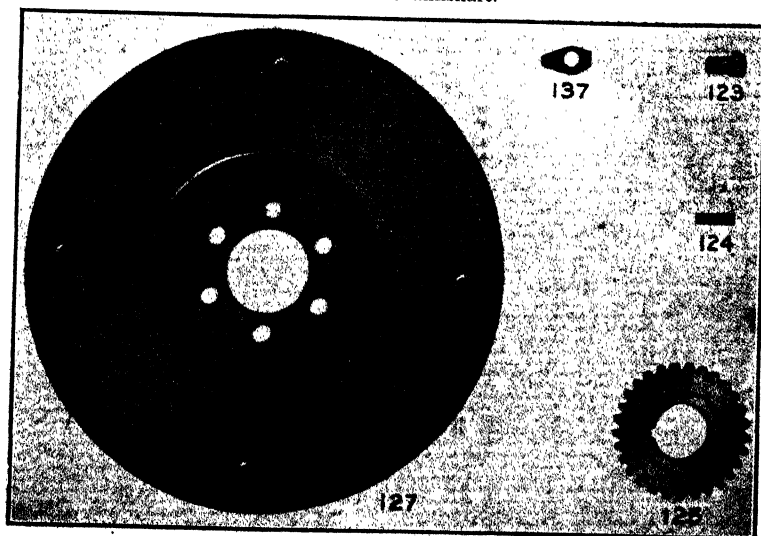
Flywheel, timing gear, and parts for assembly.
